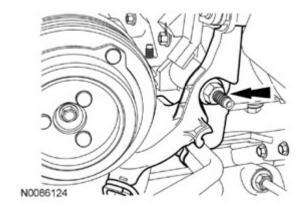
Locating Transmission Cooler Tube Support Bracket Nut Courtesy of FORD MOTOR CO.
